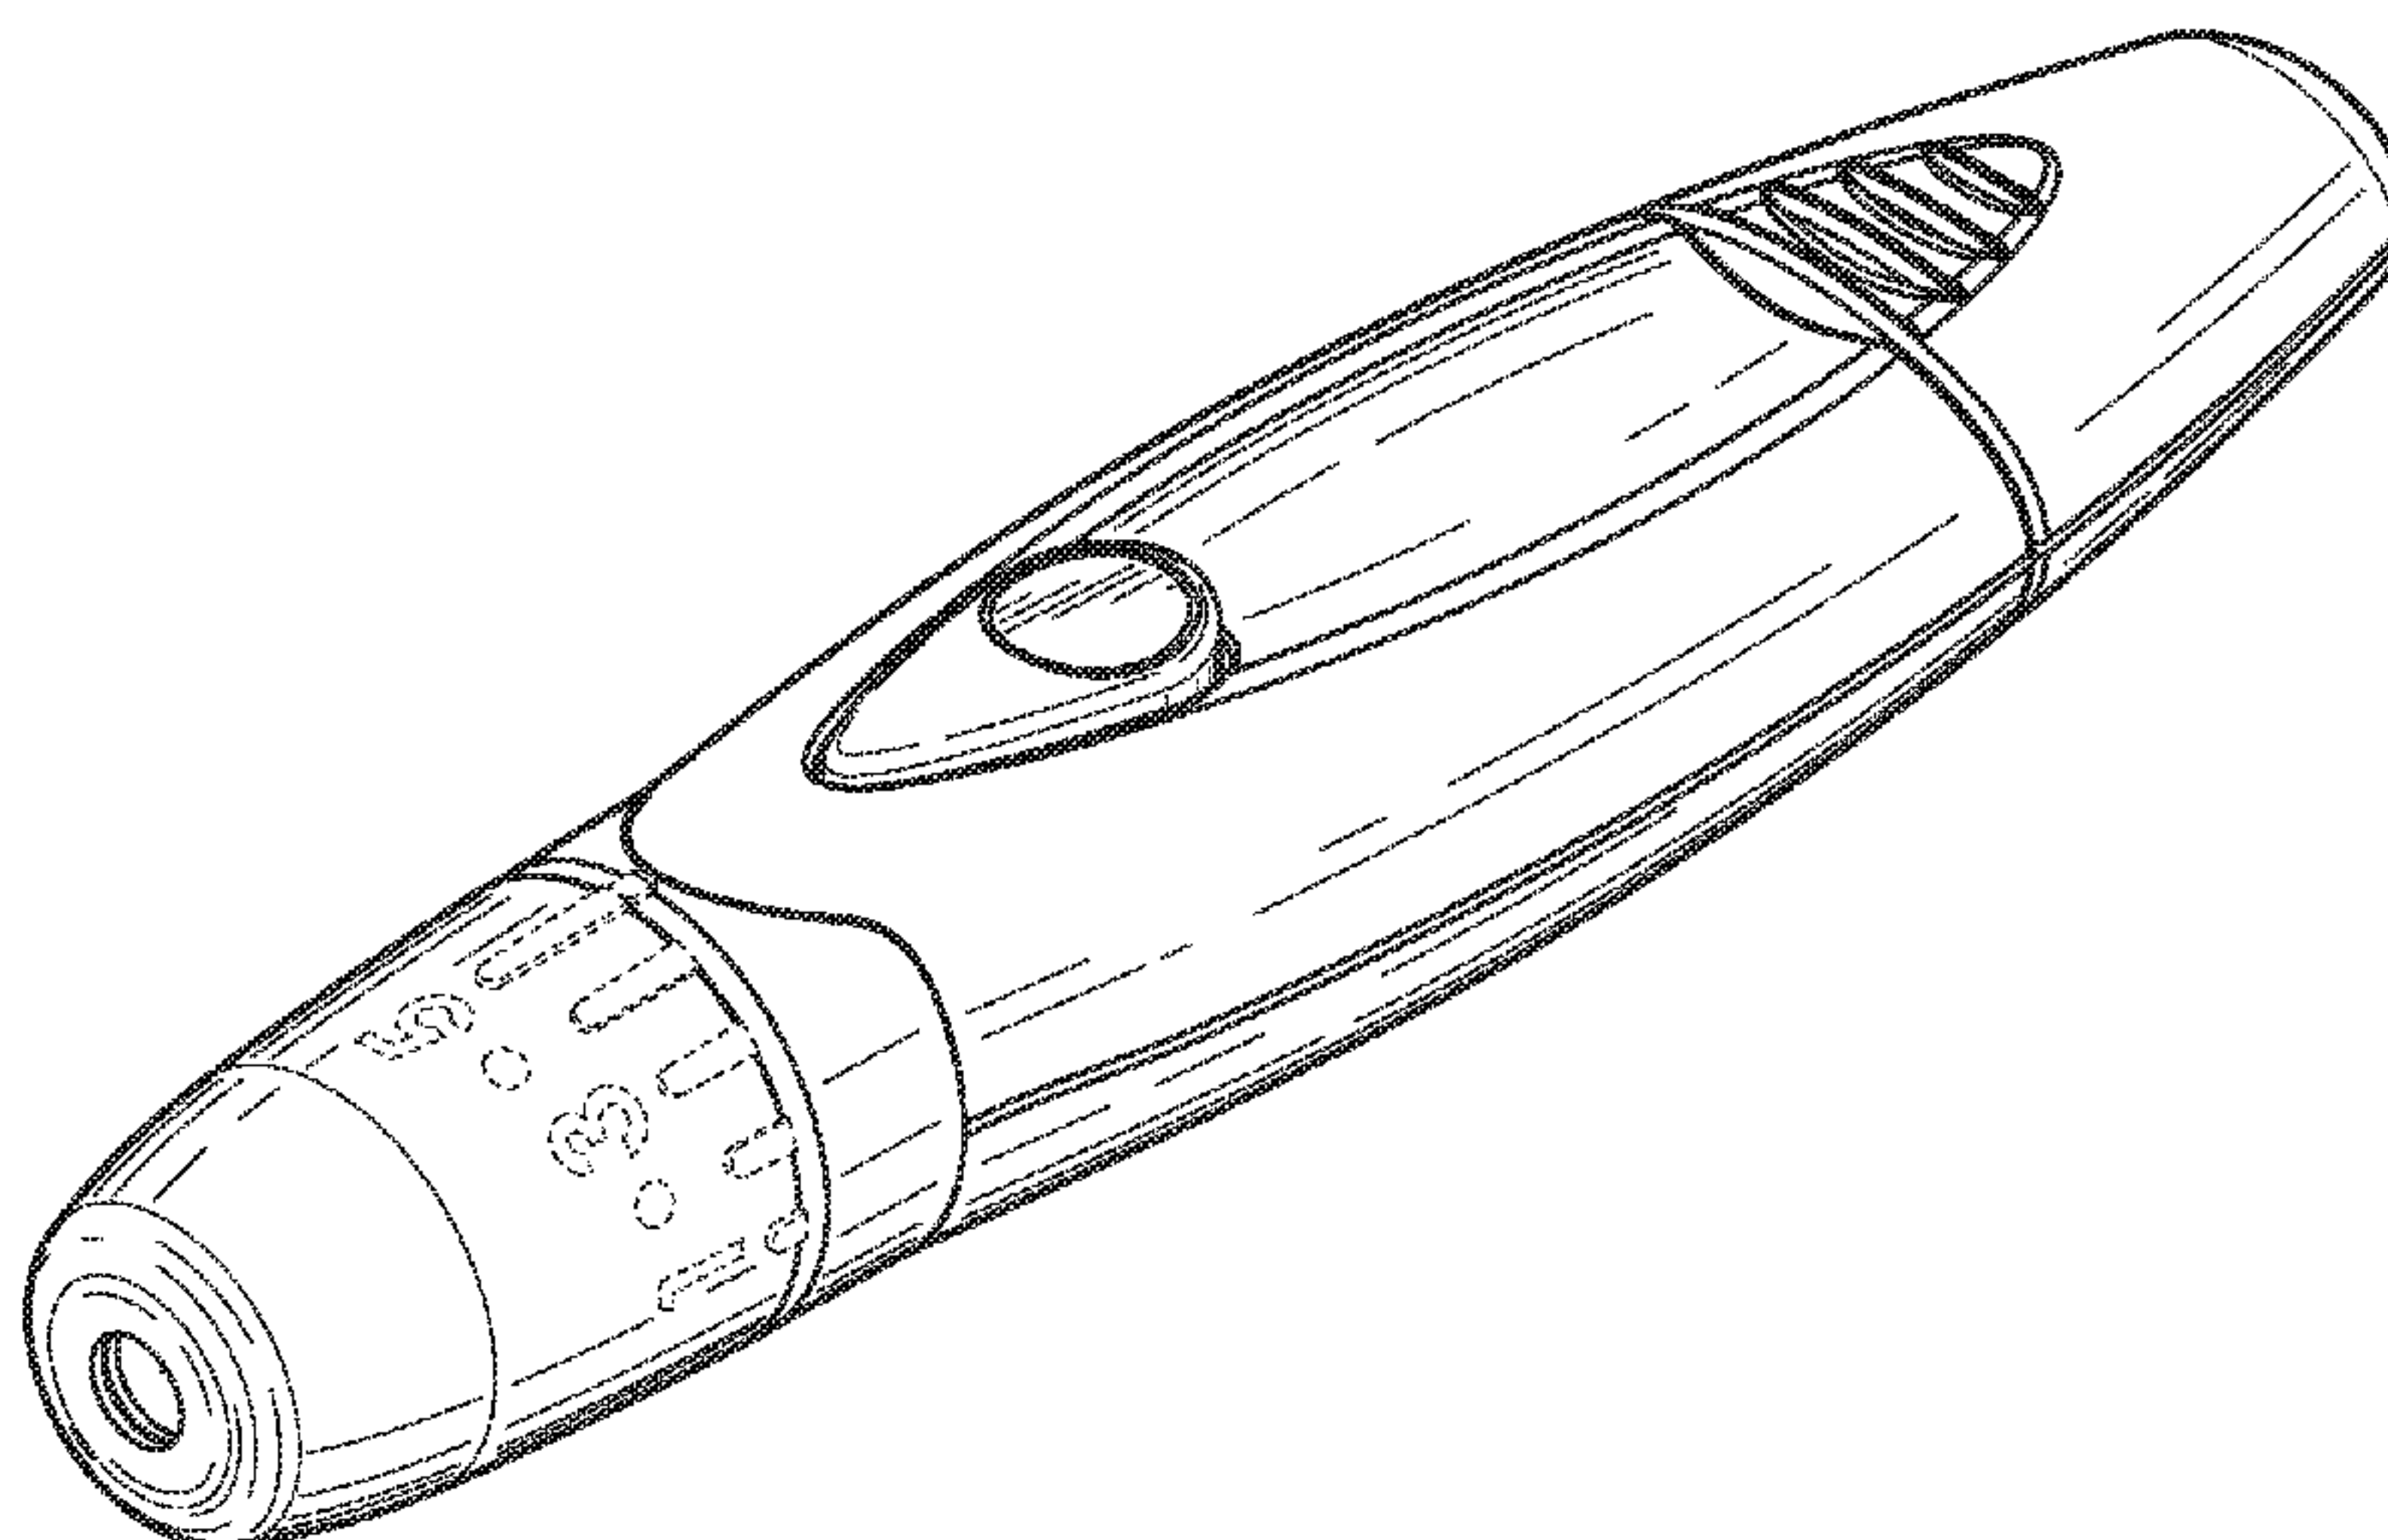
is a second side view of the lancing device design of FIG. 1.
